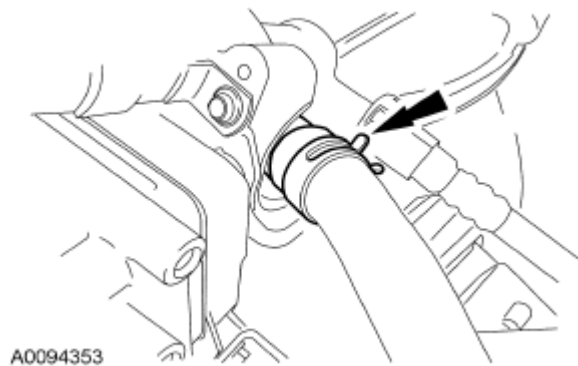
Locating Brake Booster Vacuum Hose To Upper Intake Manifold
